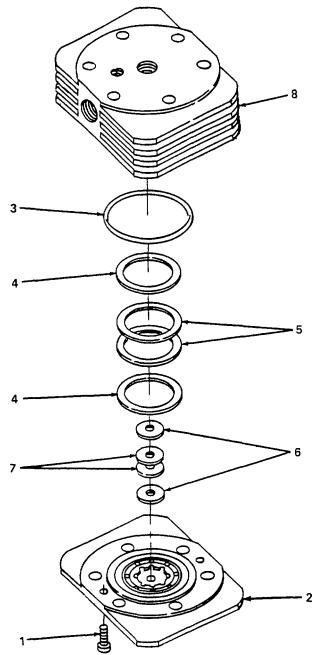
Second Stage Valve Head Assembly, Repair.
